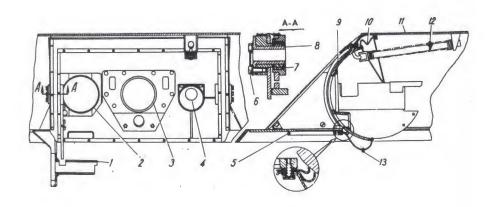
TURRET WITH MECHINE GUN SHIELD
